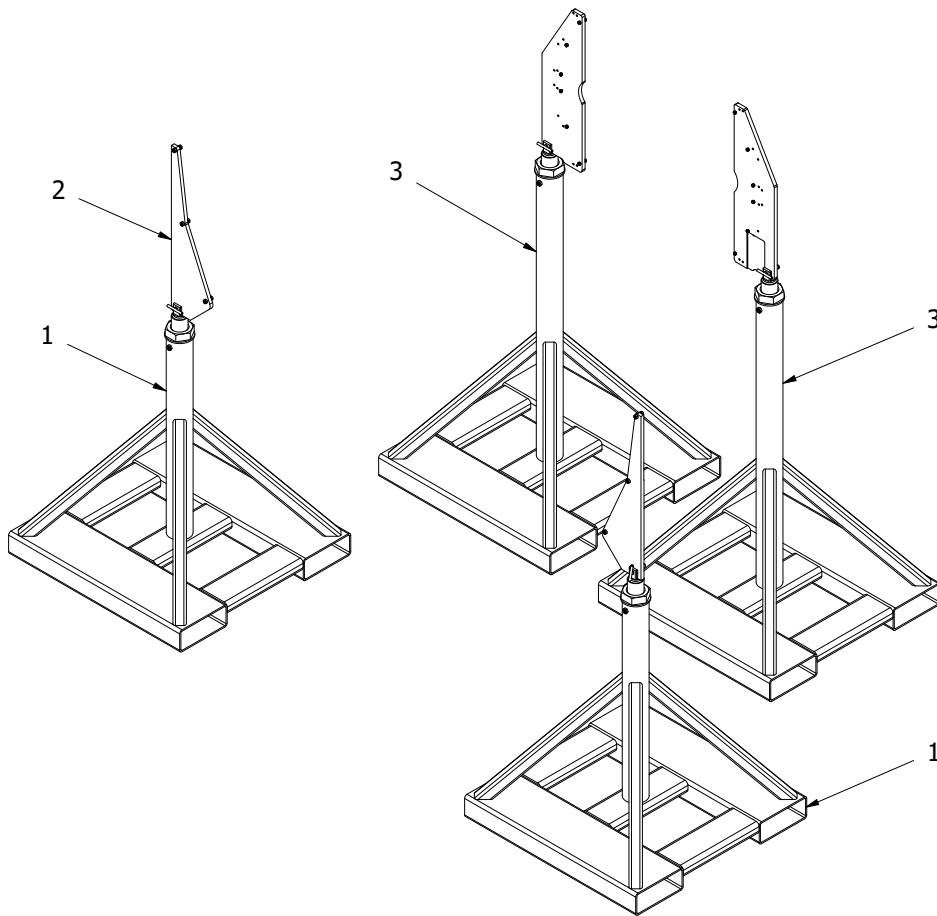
Pedestal Assembly for CF6-80A/80C2
